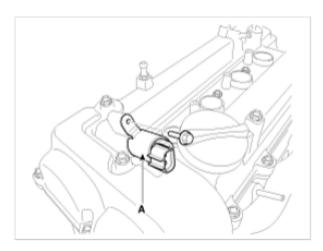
Identifying Exhaust Oil Control Valve Courtesy of HYUNDAI MOTOR AMERICA
